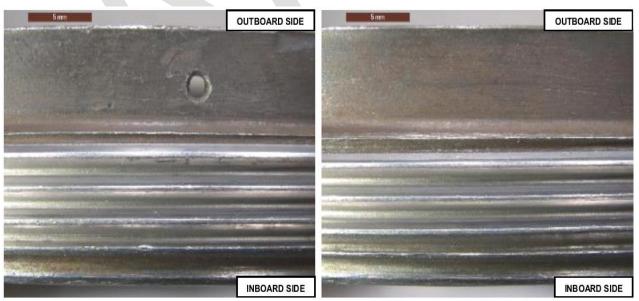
Details of the outboard locking nut thread free of thread locking adhesive (Loctite<sup>®</sup> 222)
